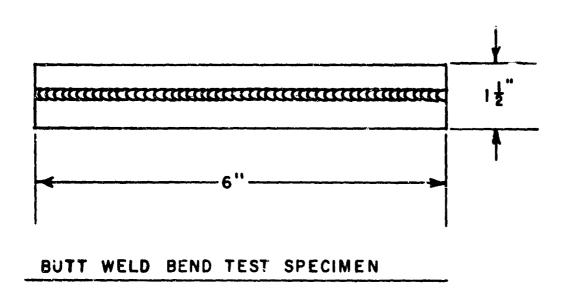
WELDED TENSILE AND BEND SAMPLES.
